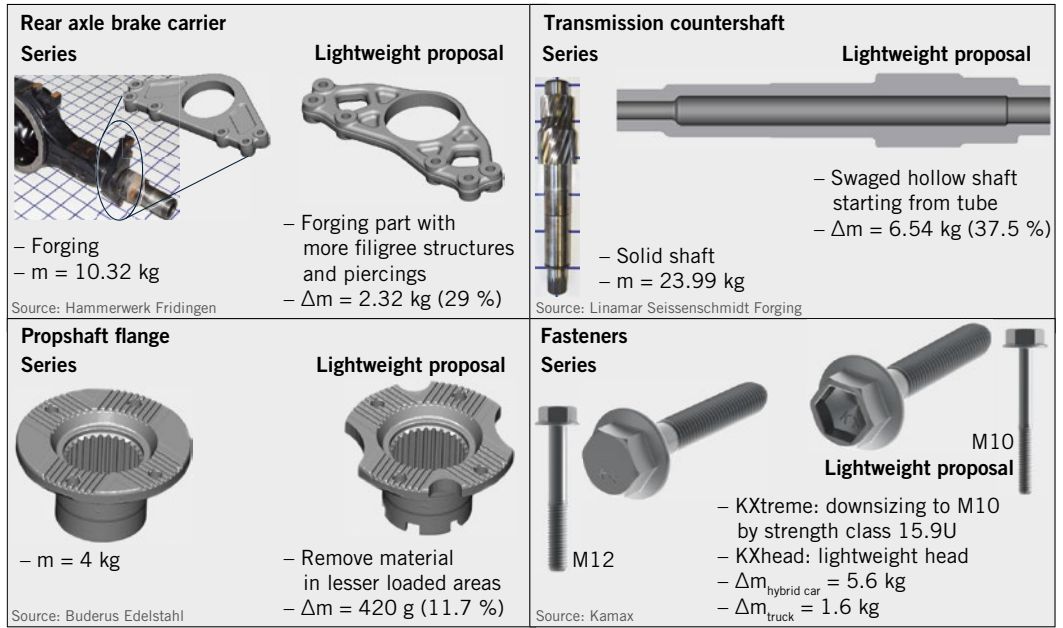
Lightweight design potential in the heavy-duty commercial vehicle powertrain – rear axle brake carrier, transmission countershaft, propshaft flange and fasteners (© Lightweight Forging Initiative)
